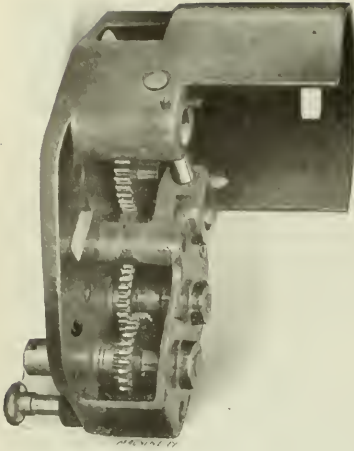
Gear-hox for Gears employed to drive Feed-rod
